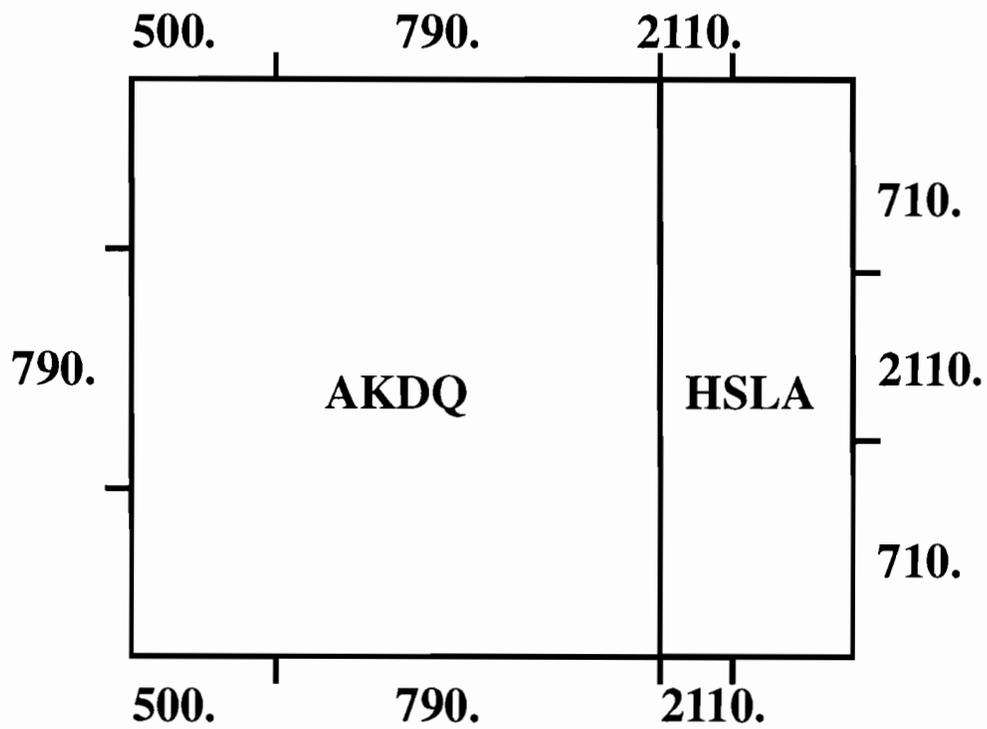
The restraining forces used for the blank with the weld 2" from center, lubricated conditions calculated based on Stoughton's drawbead model and binder force.
